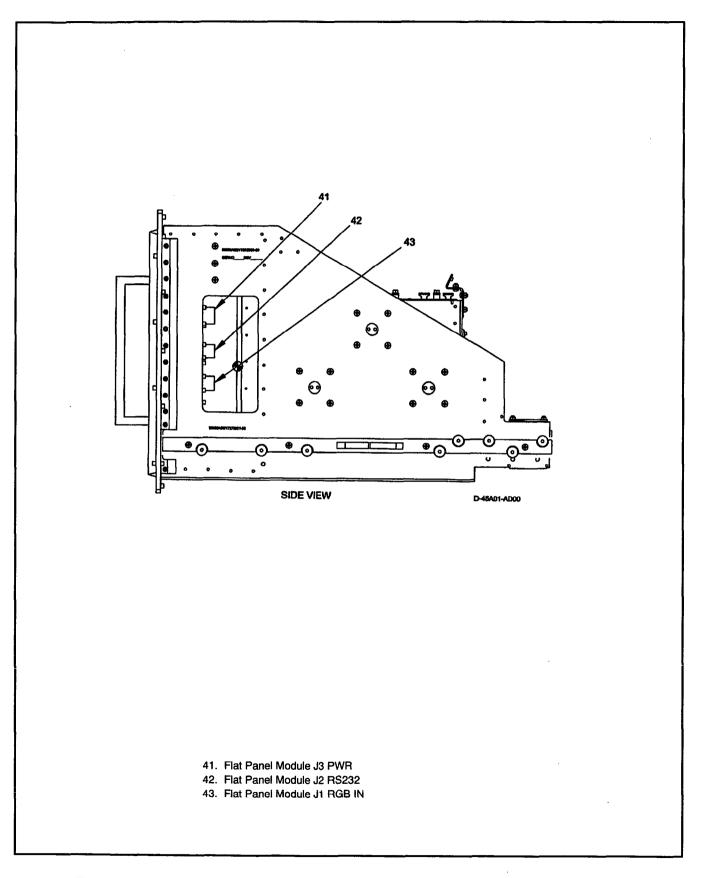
Processor-Display Assembly CP-2371/ASQ-225 and Components (Sheet 4)
